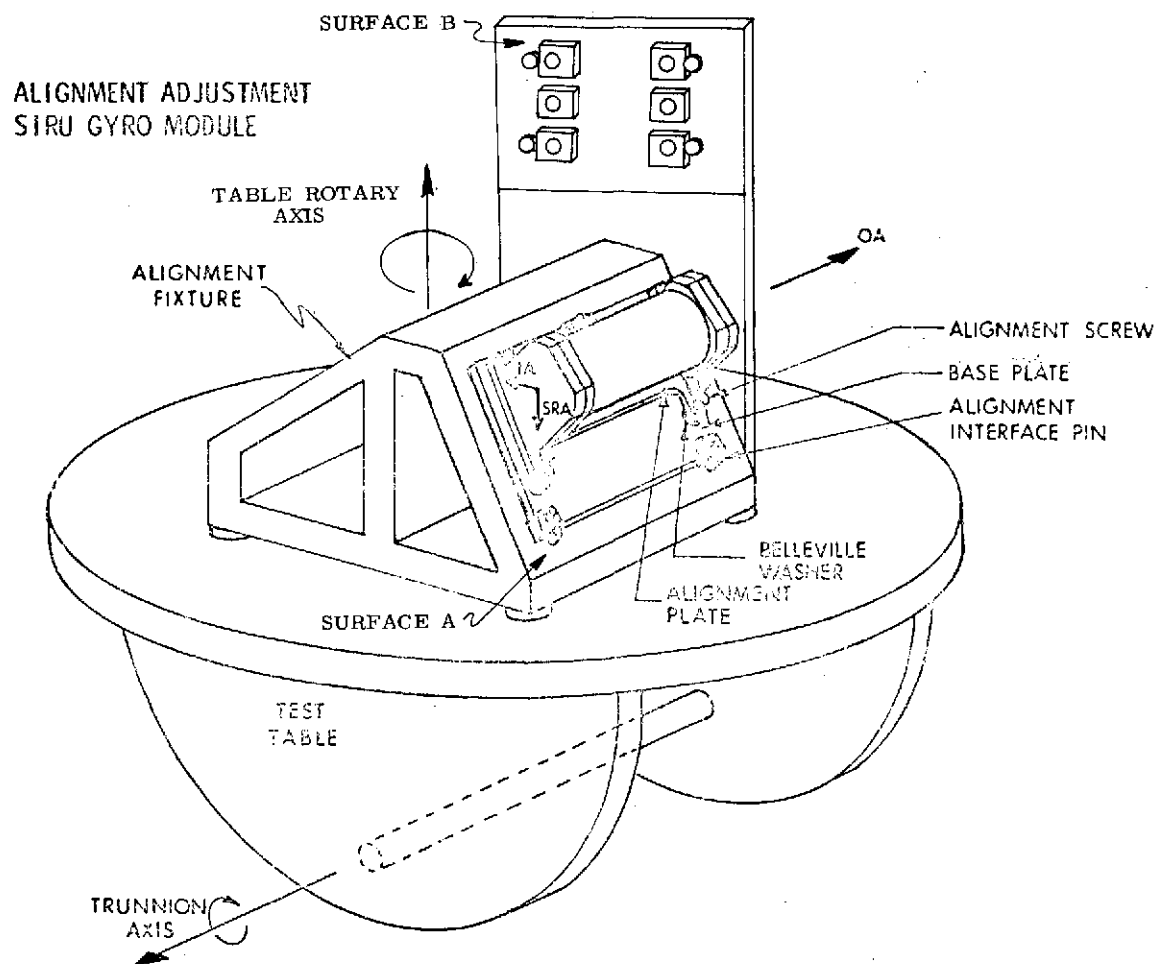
Alignment Adjustment SIRU Gyro Module
